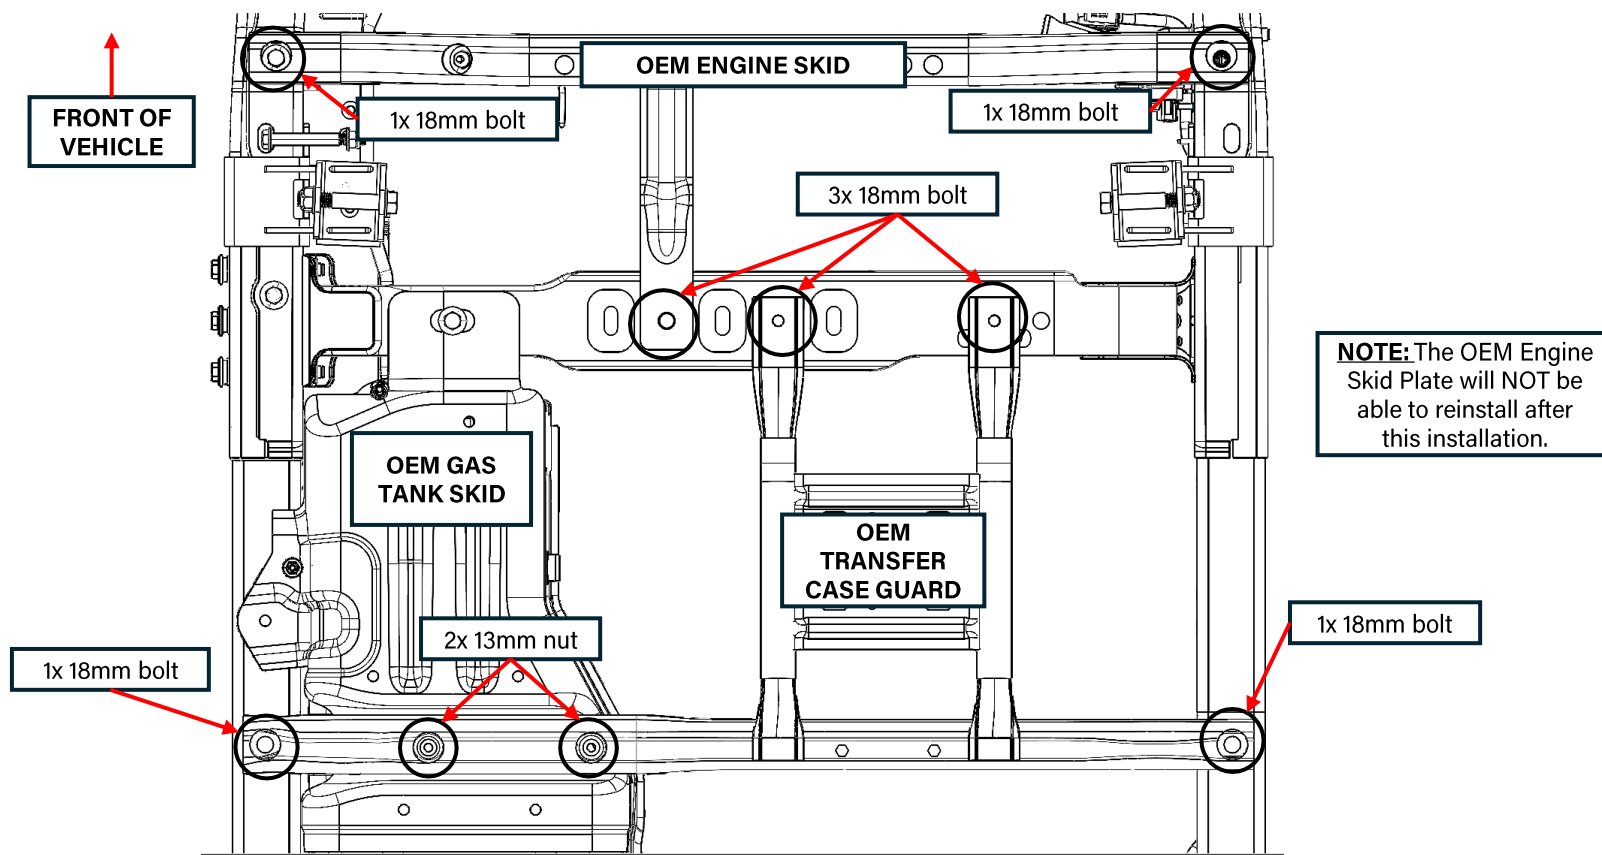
Underside view of OEM gas tank skid plate, transfer case guard, engine skid plate, and cross member with bolt locations to remove
